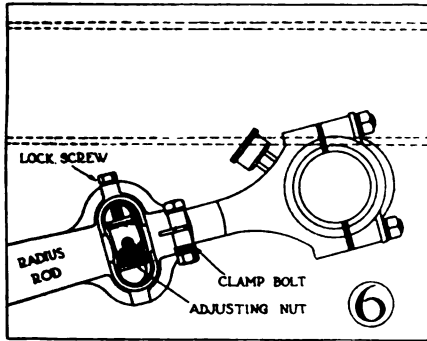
Adjusting chain tension on radius rods. Fig. 4—Valve tappet adjustment
